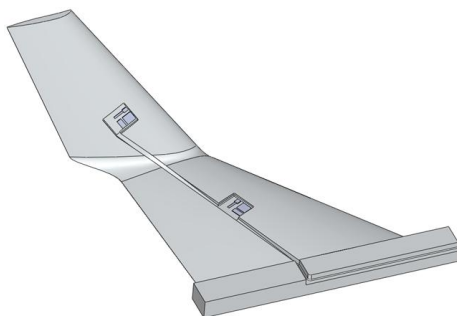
Solid drawing the Wing with Sensor Cut-Outs
